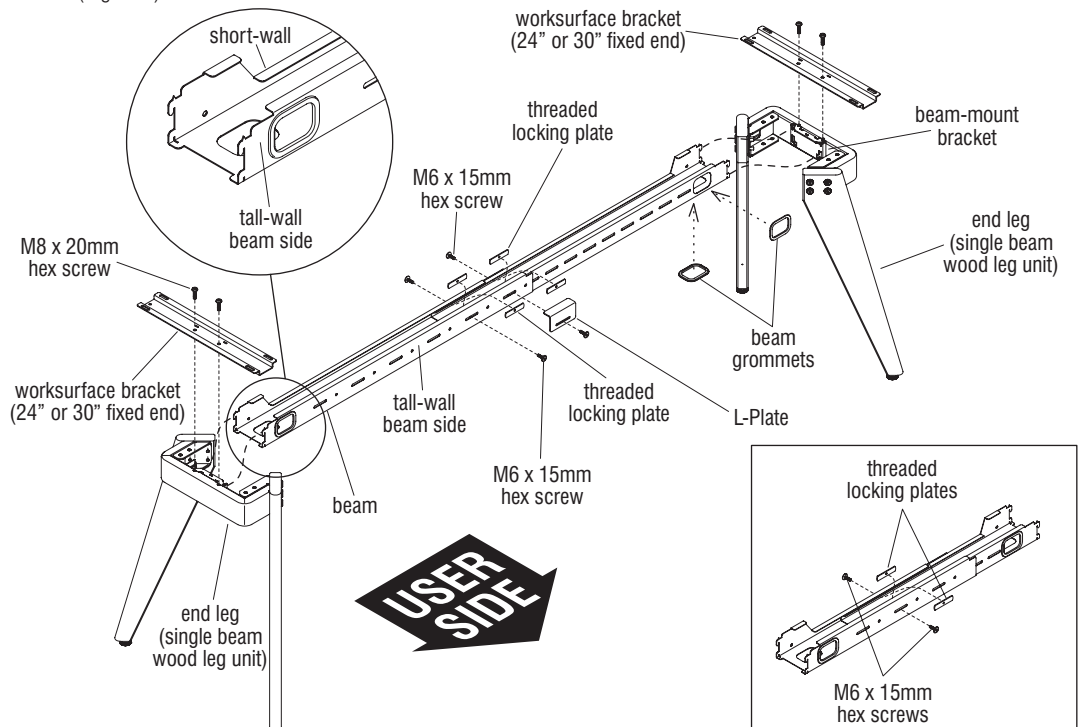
Single Beam Wood Leg Unit - Legs & Beam Assembly
